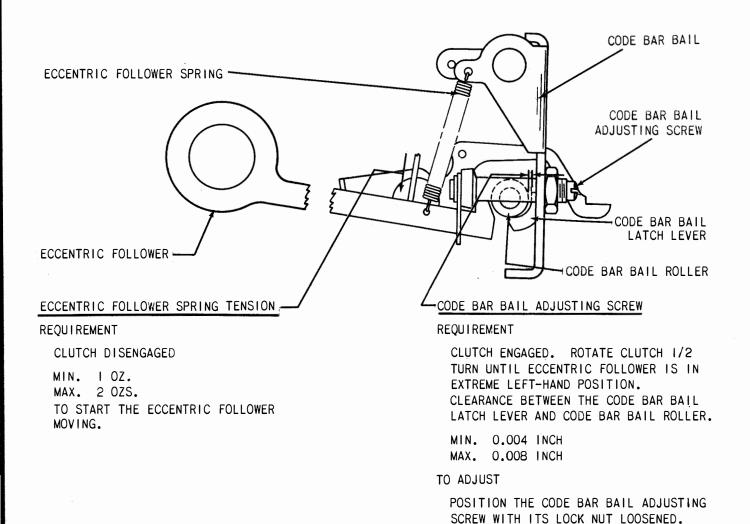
Keyboard, Code Bar Bail Mechanism
